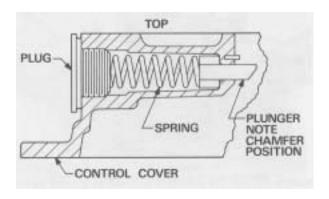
Install reverse latch plunger, spring and retaining plug. Tighten plug securely.
